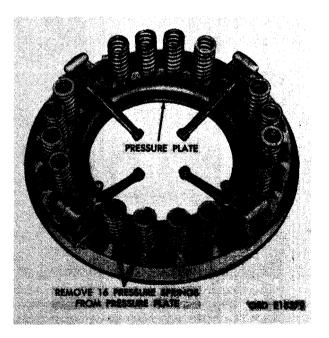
REMOVING OR INSTALLING PRESSURE SPRINGS FROM PRESSURE PLATE.
